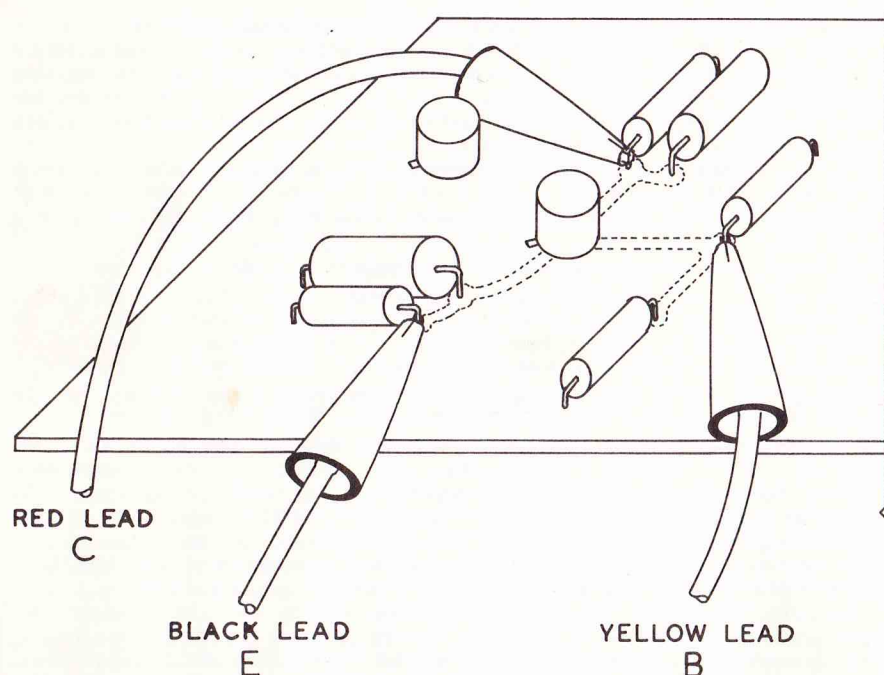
Connecting To A Transistor Wired On Printed Circuit Board
